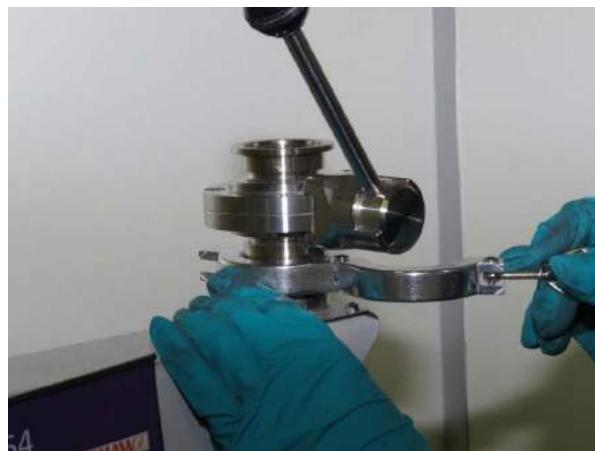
Attach the upper valve (S1) with clamp (SL2)
